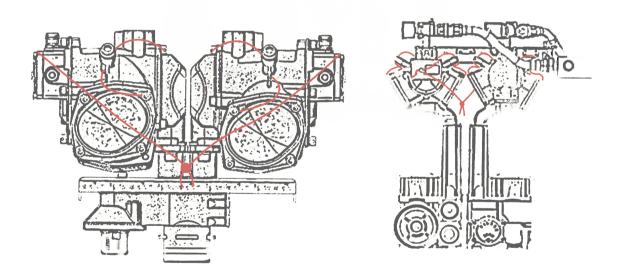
The sealing of the measurement transducer Q-Meter type 2 with Smart pulser 1
